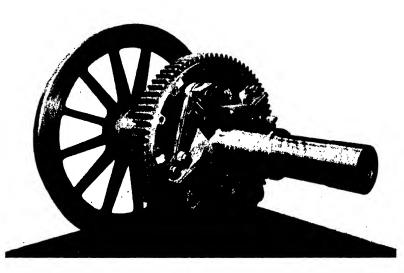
(ii) View of flexible gear with cover and half-wheel removed. Swiss 12,000 h.p. locomotive with Winterthur universal drive.
